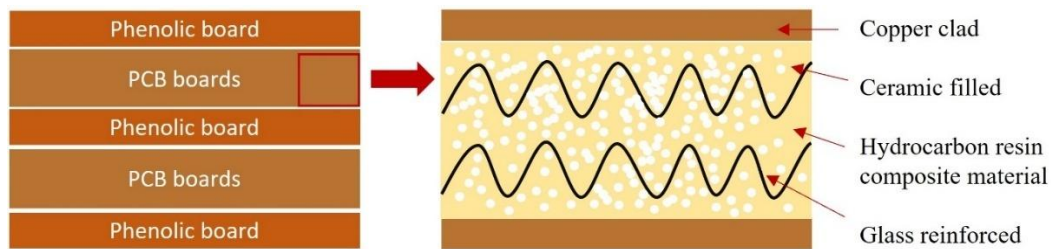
Schematic layout of board stacking configuration during machining and structural design of the PCB.
